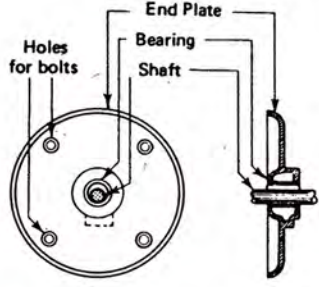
If the shaft can be moved vertically, it indicates a worn bearing or worn rotor shaft.
